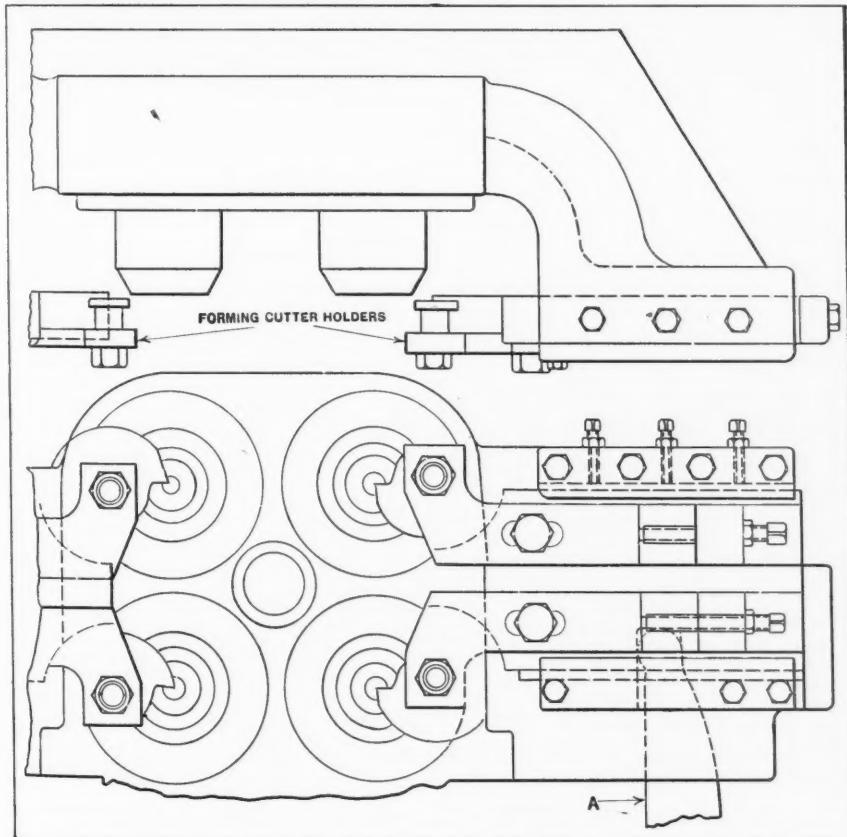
Arrangement of Forming Tool Slides for Machining Part Shown in Fig. 3
